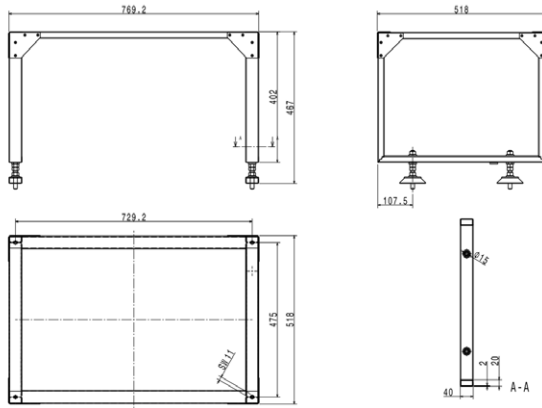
Layout of the heat pump outdoor unit for ground mounting.
